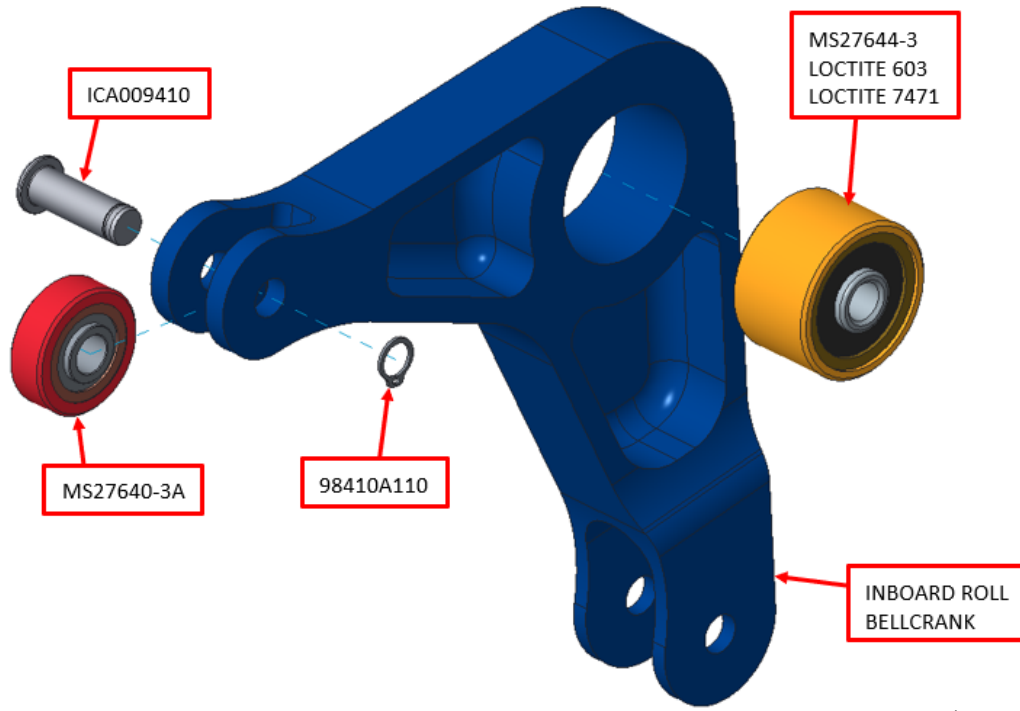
Inboard Roll Bellcrank. LH Side Shown.
